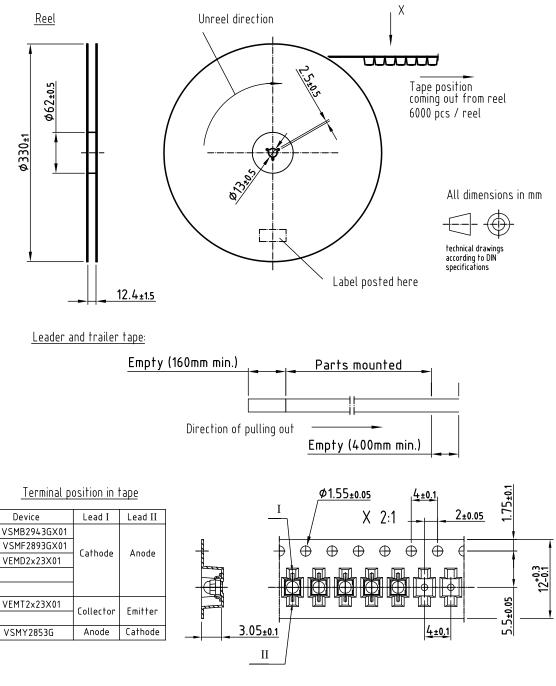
Issue: prel; 03.08.12
